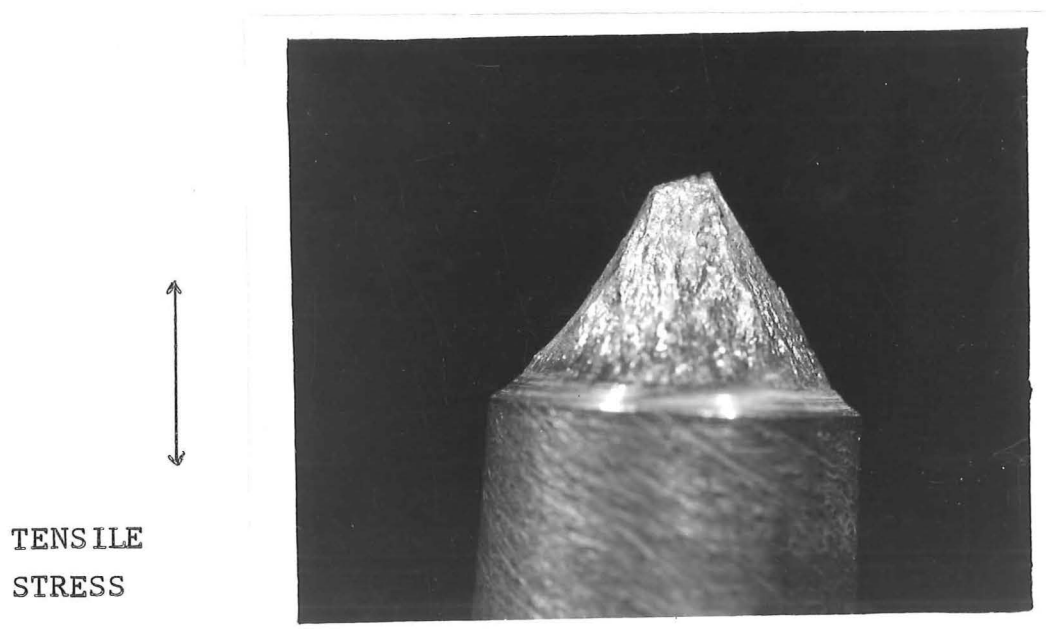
/24: Corrosion fatigue fracture in notched direct stress specimen. Tensile mode absent and only shear mode operative.
